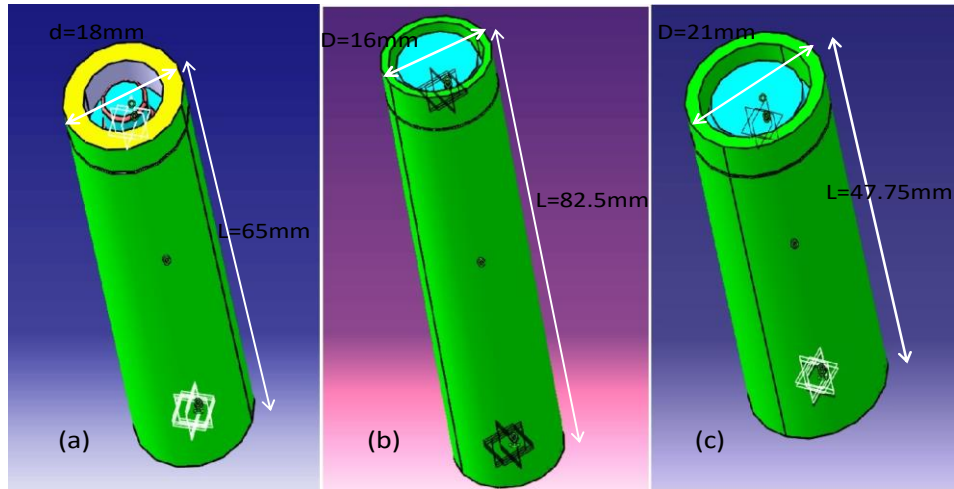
(a) Datum geometry (DG) i.e. 18650 LIB, (b) large geometry (LG) and (c) small geometry (SG).
